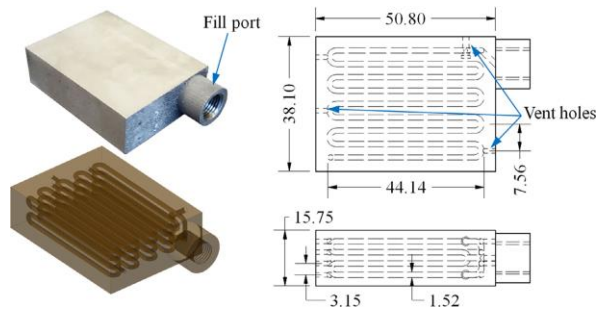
Ti-6Al-4V ML-OHP with fill port and vent holes: (top left) photograph after milling of faces, (bottom left) transparent view of channels in the part and (right) dimensioned drawings (in millimeters) [51].
